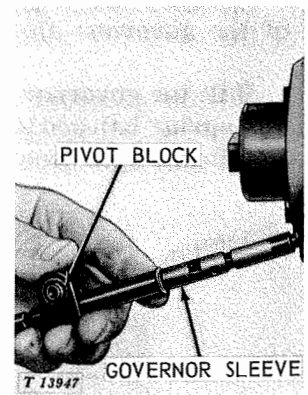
Removing Governor Sleeve Assembly
